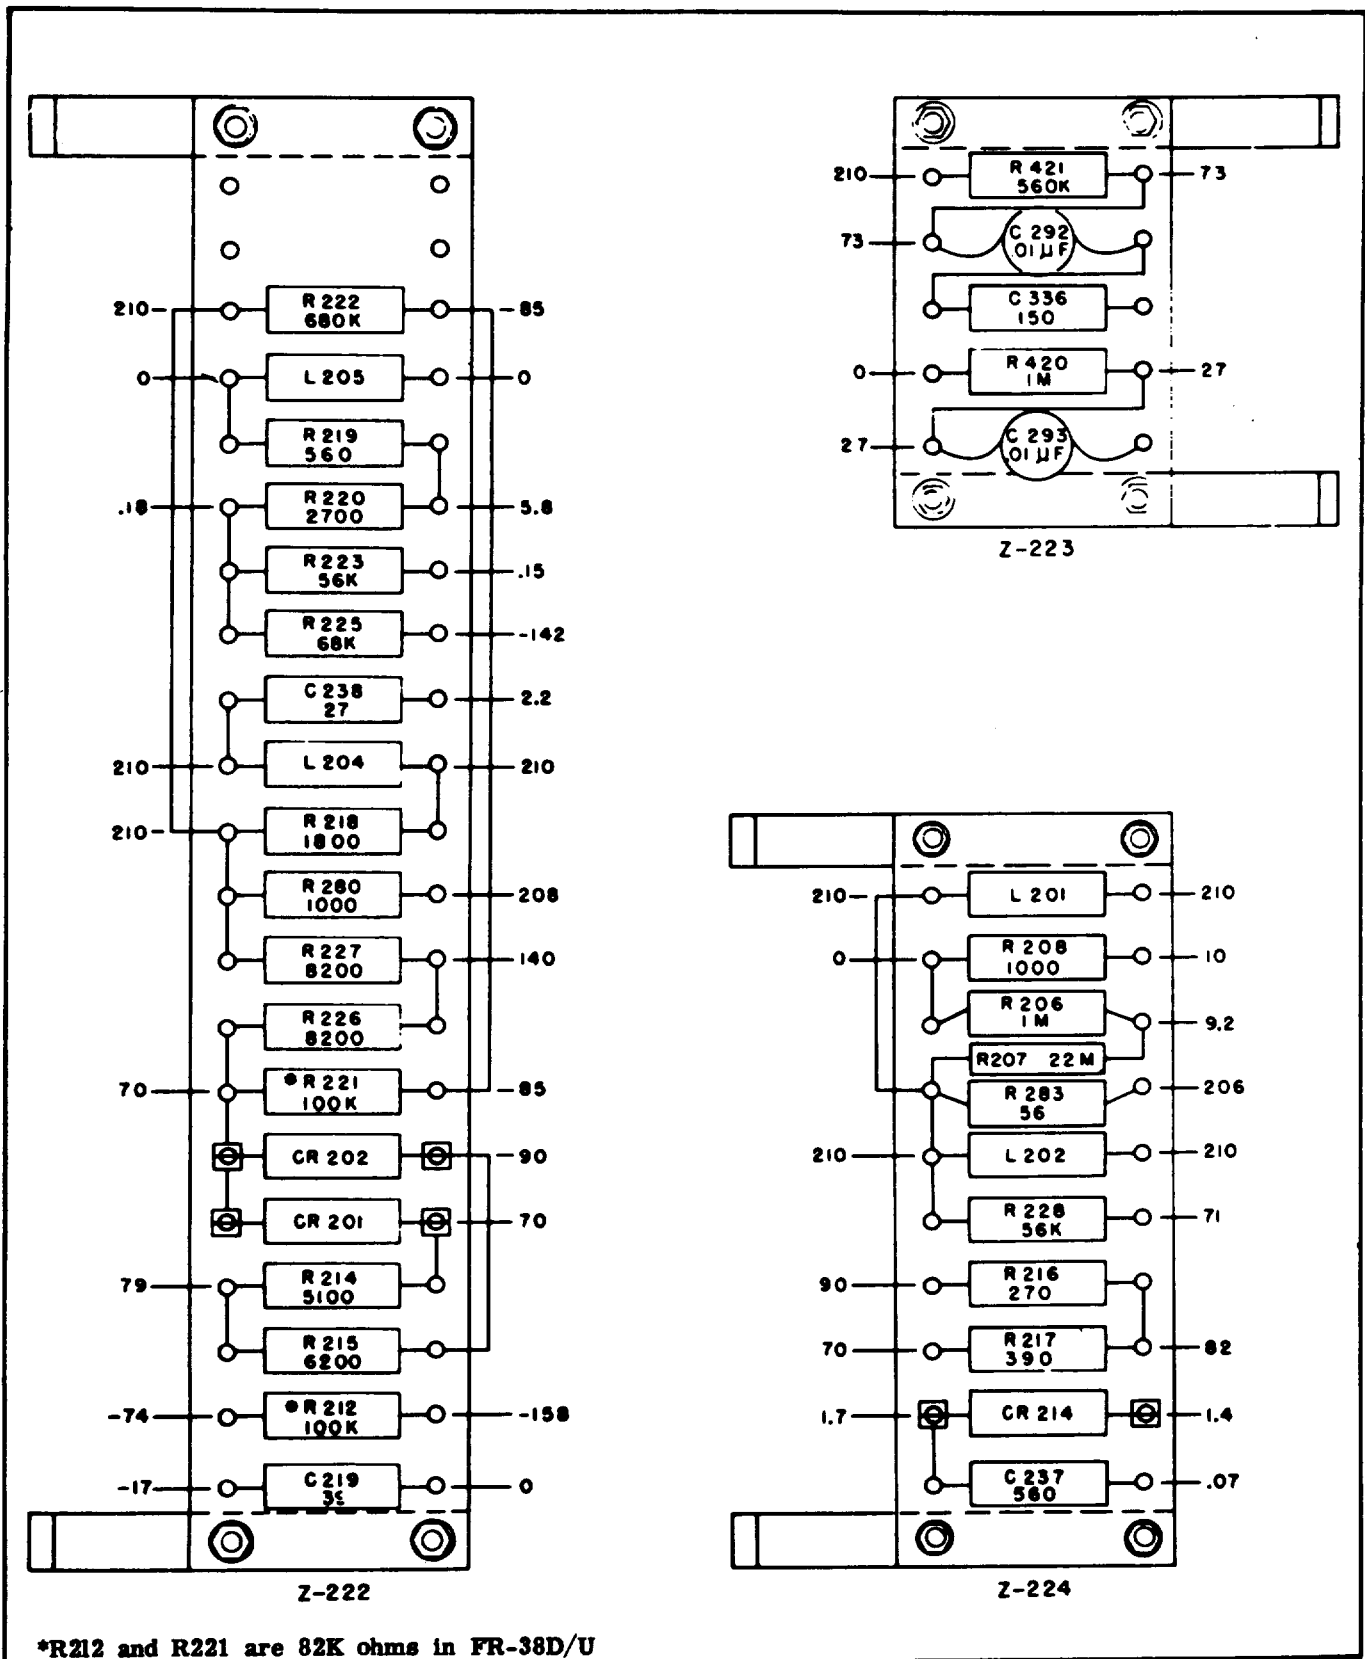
Resistor Board Drawings Z-222 through Z-224
